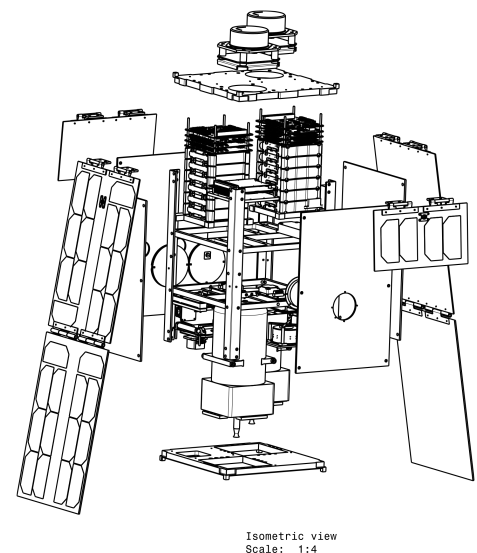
Exploded view of the SCATTER spacecraft, with body panels removed to expose the internal components.
